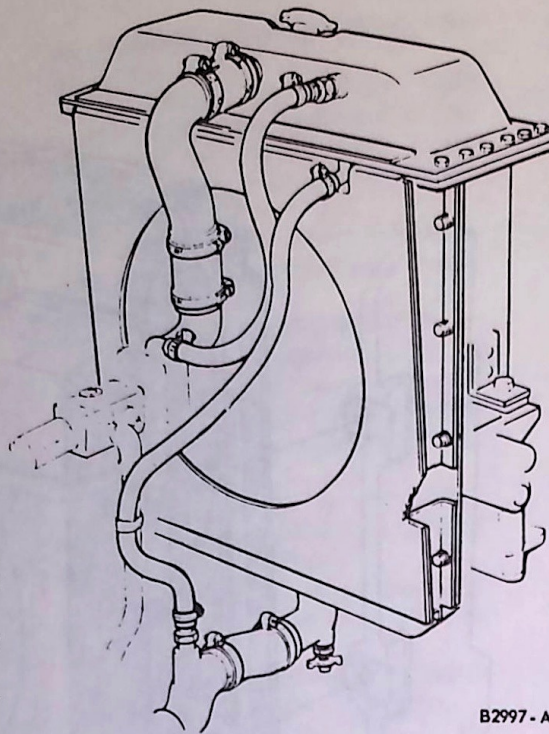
W-Series Radiator Installation— Detroit Diesel
